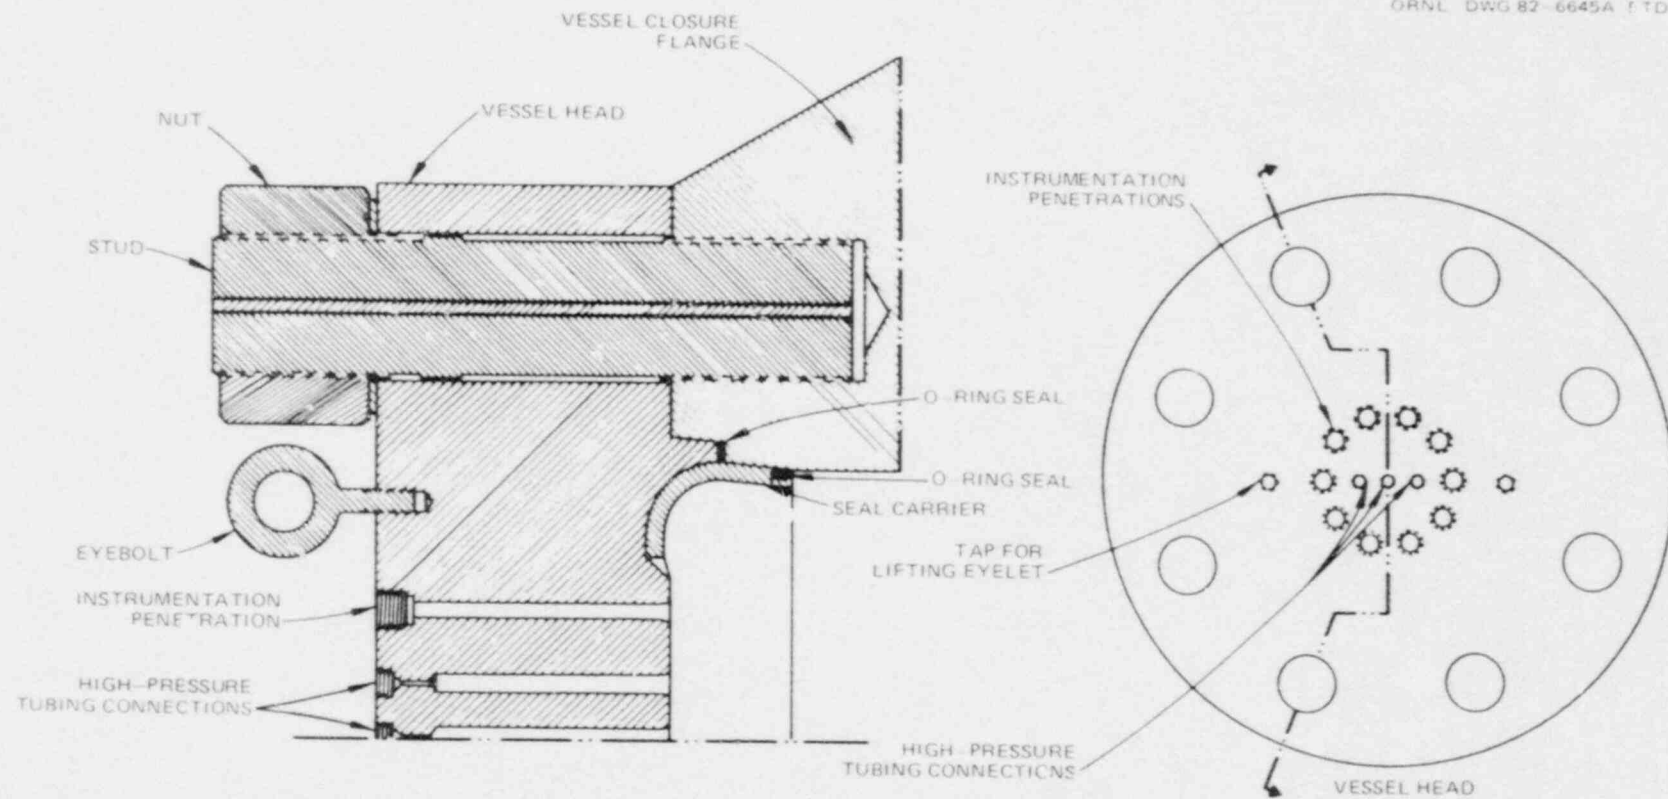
Intermediate test vessel head and access nozzle assembly diagram showing locations of seals for closure and instrumentation penetration.
